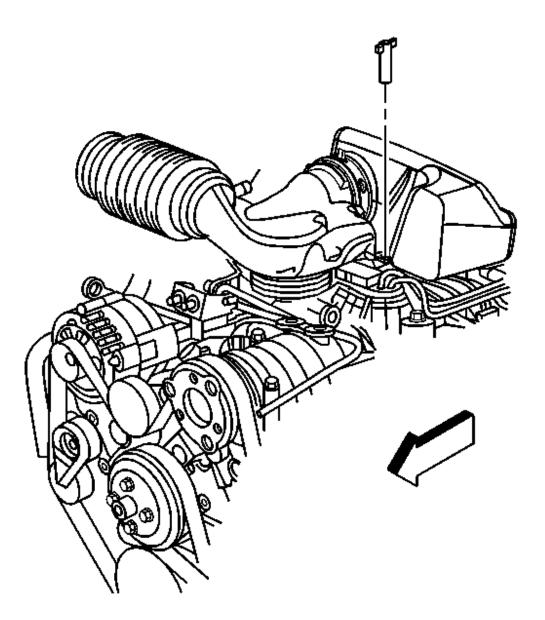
View Of Air Cleaner Adapter Nut Courtesy of GENERAL MOTORS CORP.
